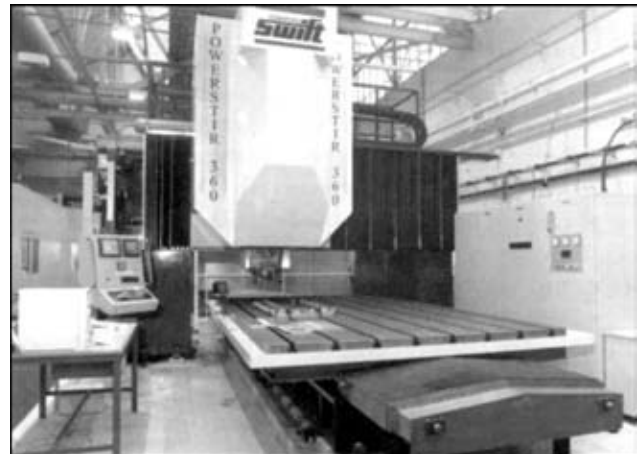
60 kW Power Stir-360 machine of Crawford Swift, Great Britain
